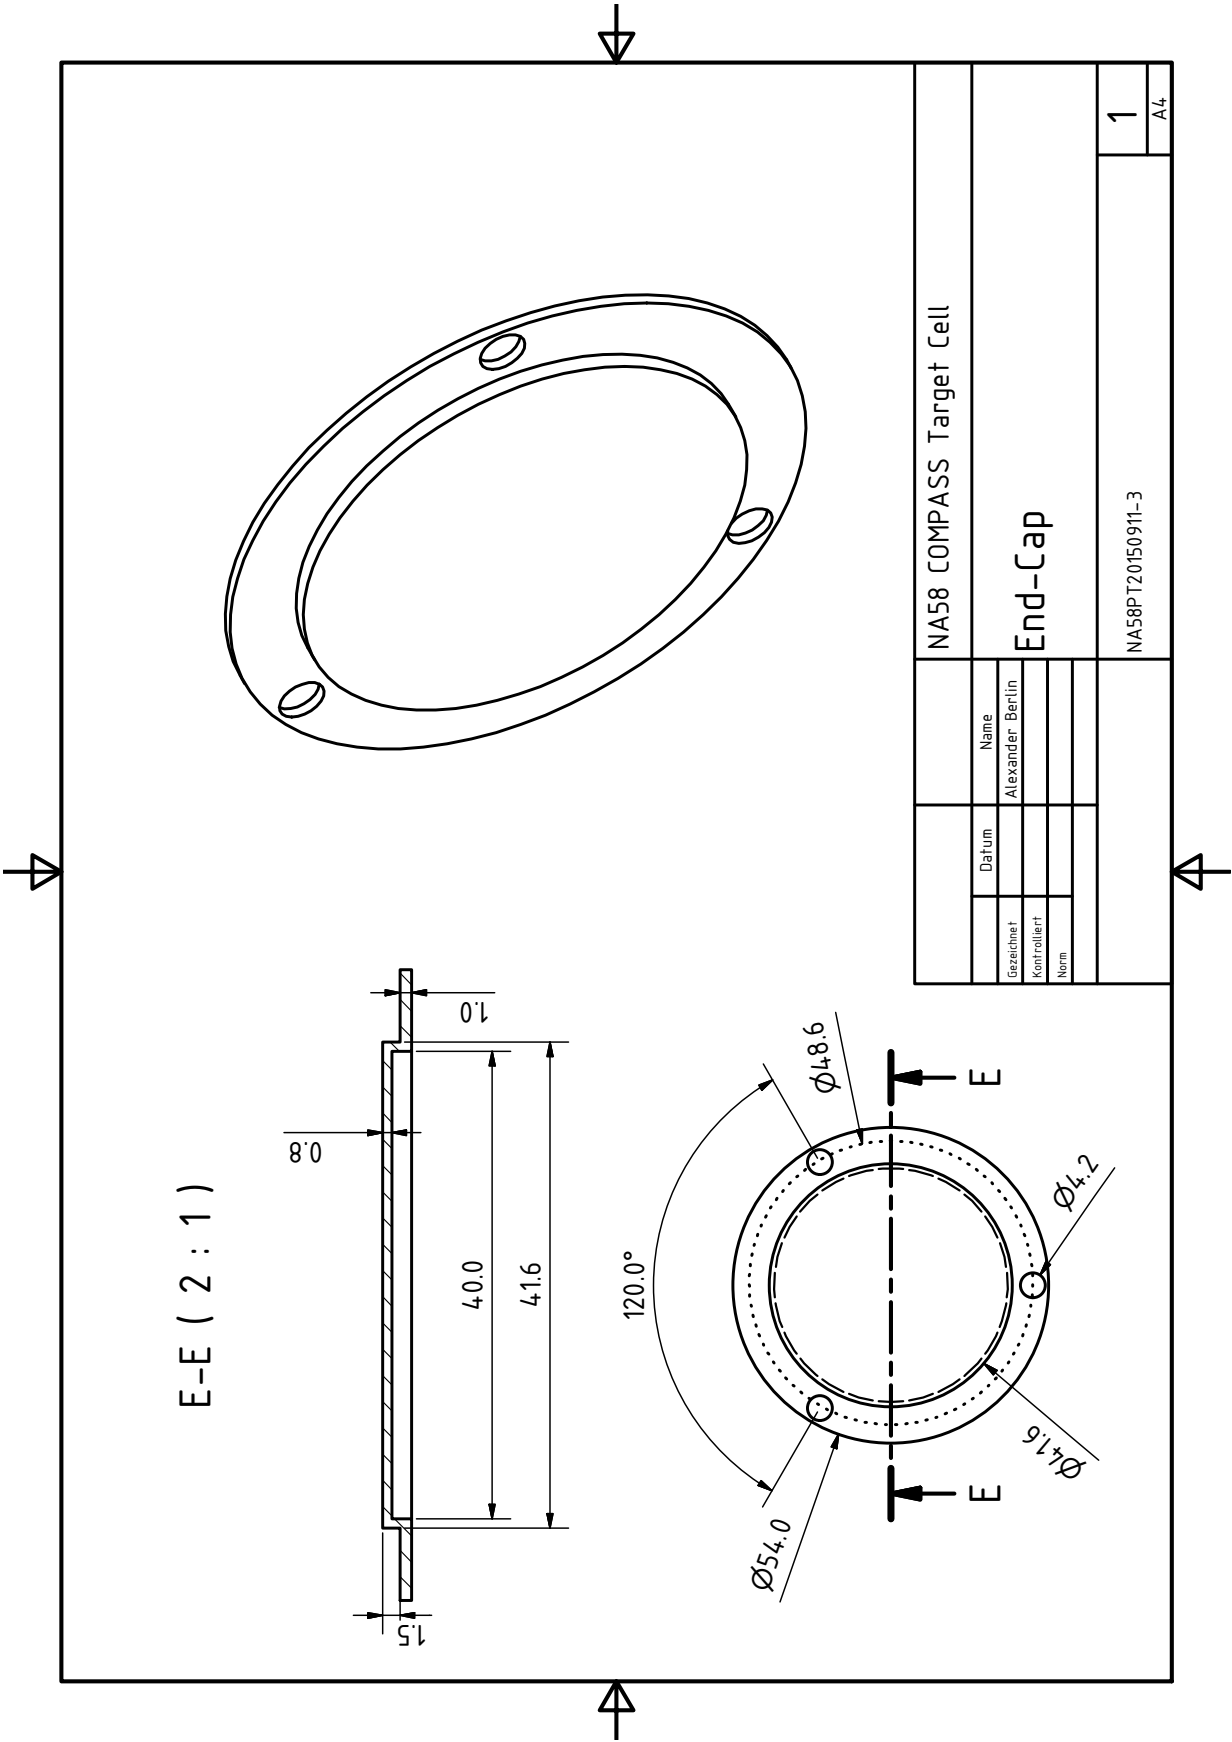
Technical drawing of the PCTFE end-cap.
